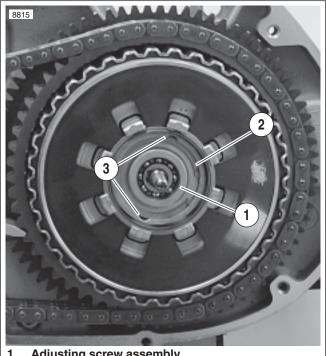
Adjusting Screw Assembly Aligning Tabs
